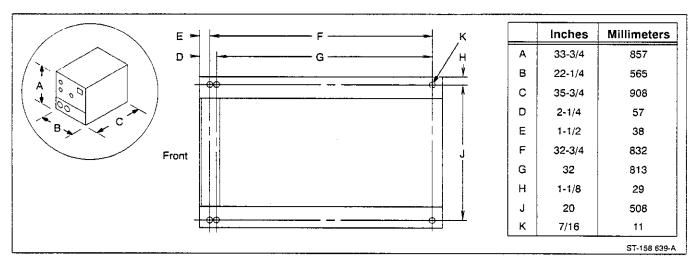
Overall Dimensions And Base Mounting Hole Layout
